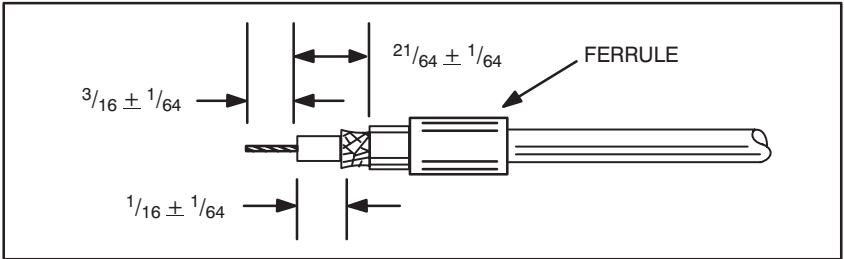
RG-59/U (Belden 9259) Cable Stripping Dimensions
